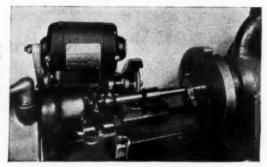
Using a portable attachment to grind the threads of a high speed boring tool. The tool was hardened and drawn and thread was found to be distorted. By means of the attachment the threads were reground at a worthwhile saving.
